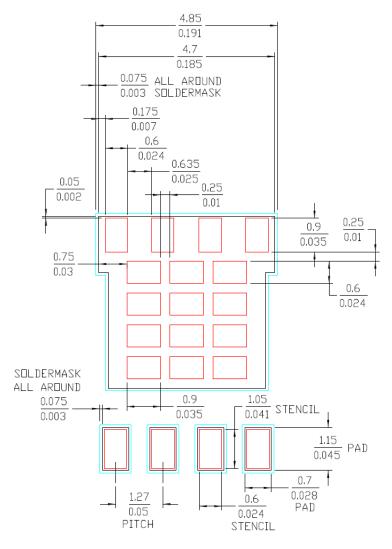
Solder Stencil Design Illustrating how Stencil Openings are Divided into an Array for Large Device Areas
